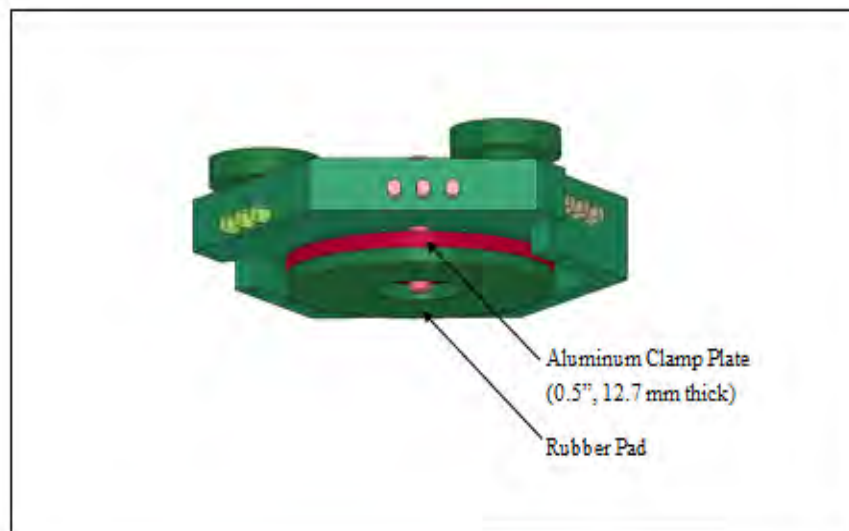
Traveller VVER Top Plate Assembly Showing Integral Axial Clamp and Rubber Pad
